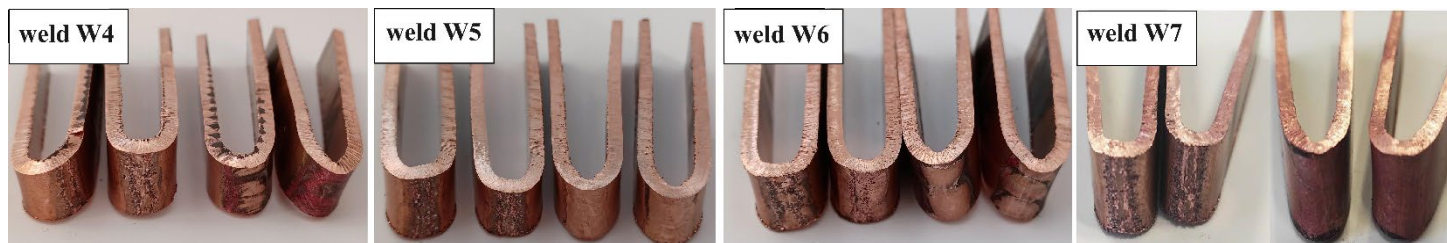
Specimens sectioned from welds W4 – W7 after transverse bend test.
